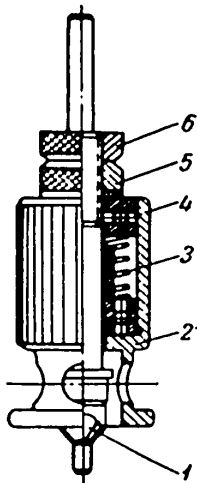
Countersinking Attachment Inserted in the Chuck of a Hand Drill or Drill
